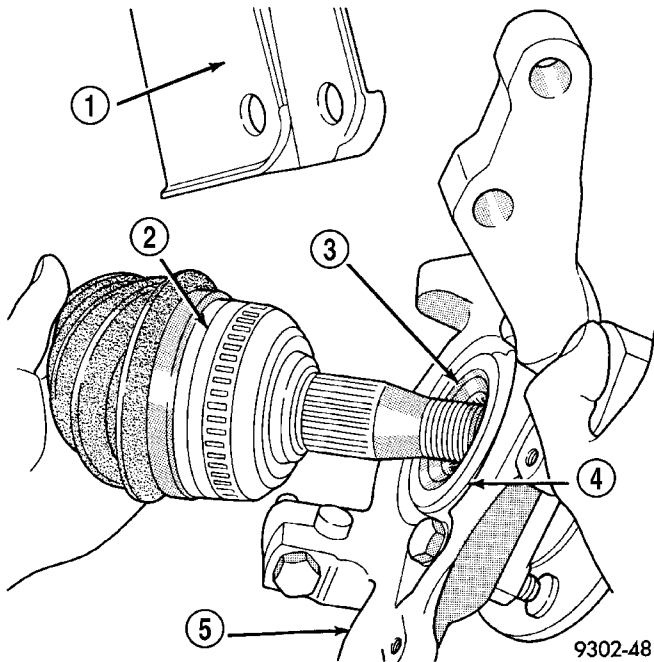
Outer C/V Joint Installation Into Hub and Bearing
